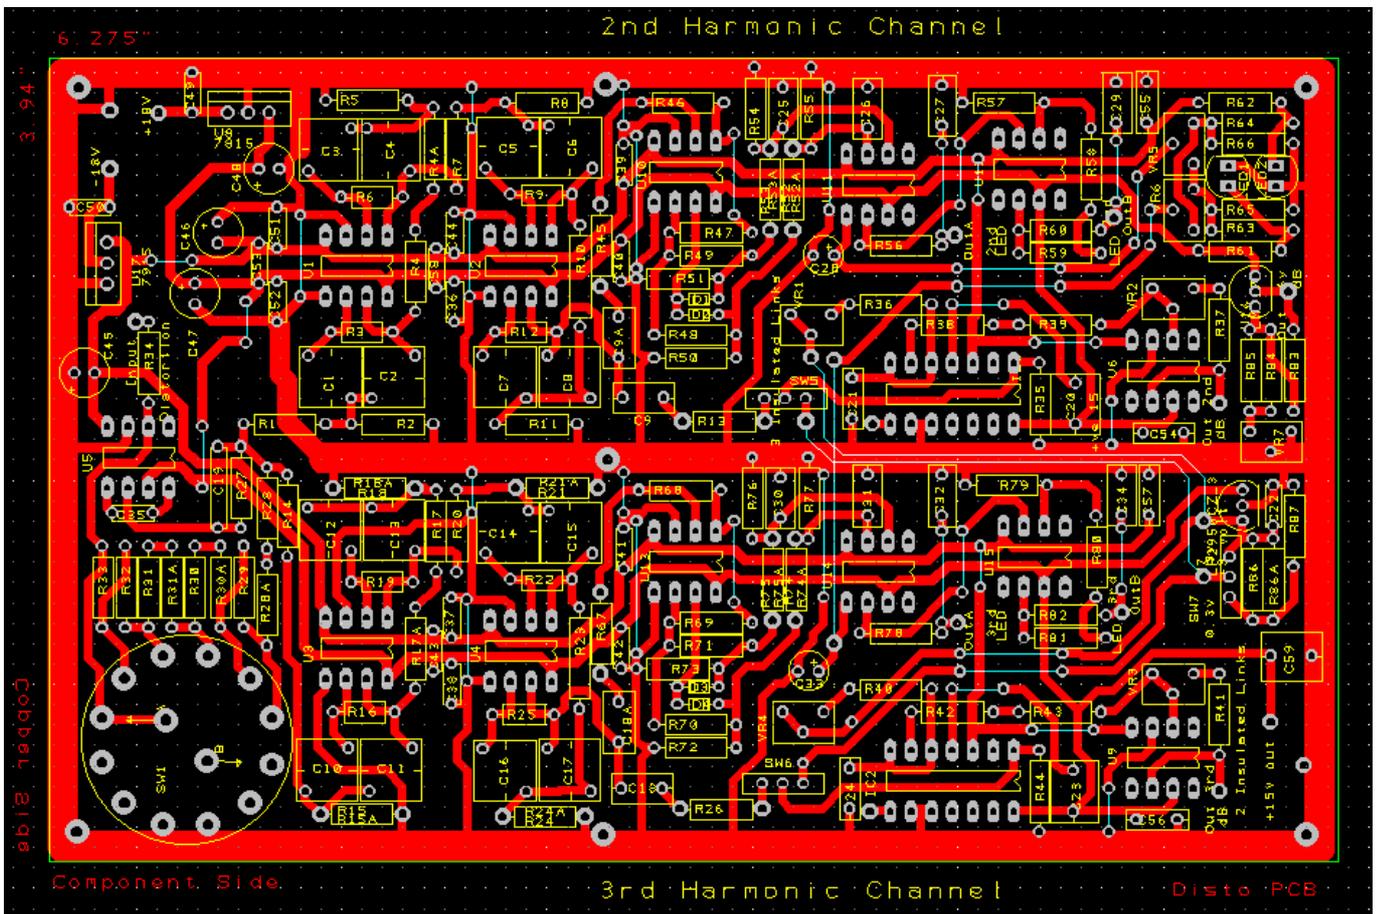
The main PCB used for the prototype assembly shown. This board houses the complete real time distortion measurement system but the forty display LED's and their LM3915 logarithmic display drivers were located on two small, low density, panel mounting PCB's.
